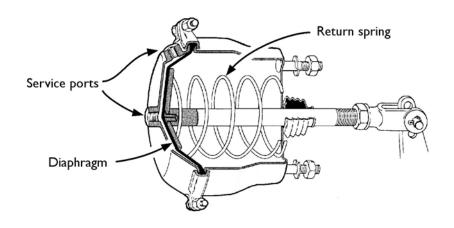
TYPICAL SPRING BRAKE CHAMBER
